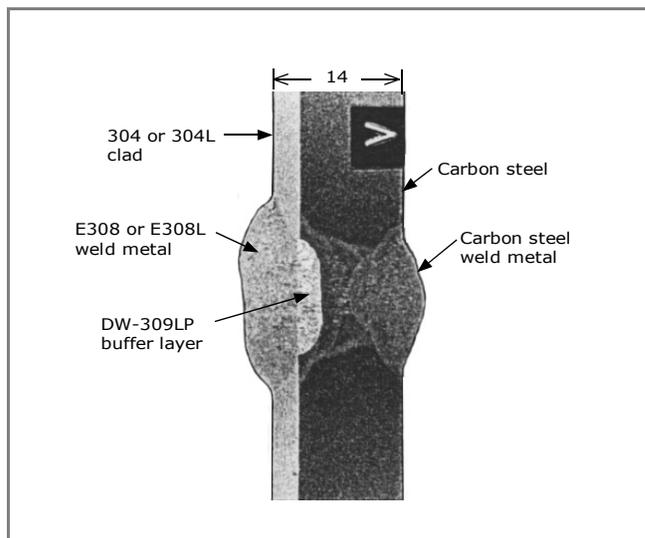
A DW-309LP buffer layer in a vertical joint weld of stainless-clad steel.
